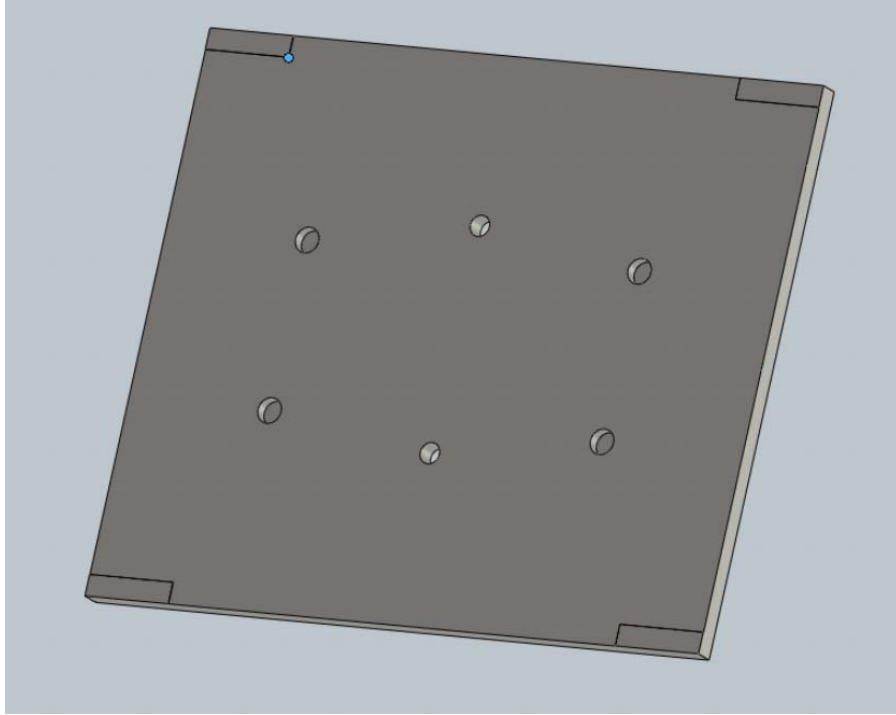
CAD model of “C03 - Chamber Bottom” using Solidworks.
